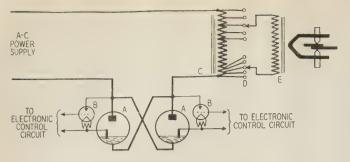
Schematic diagram of spot-welding control circuit using ignitron weld timing
